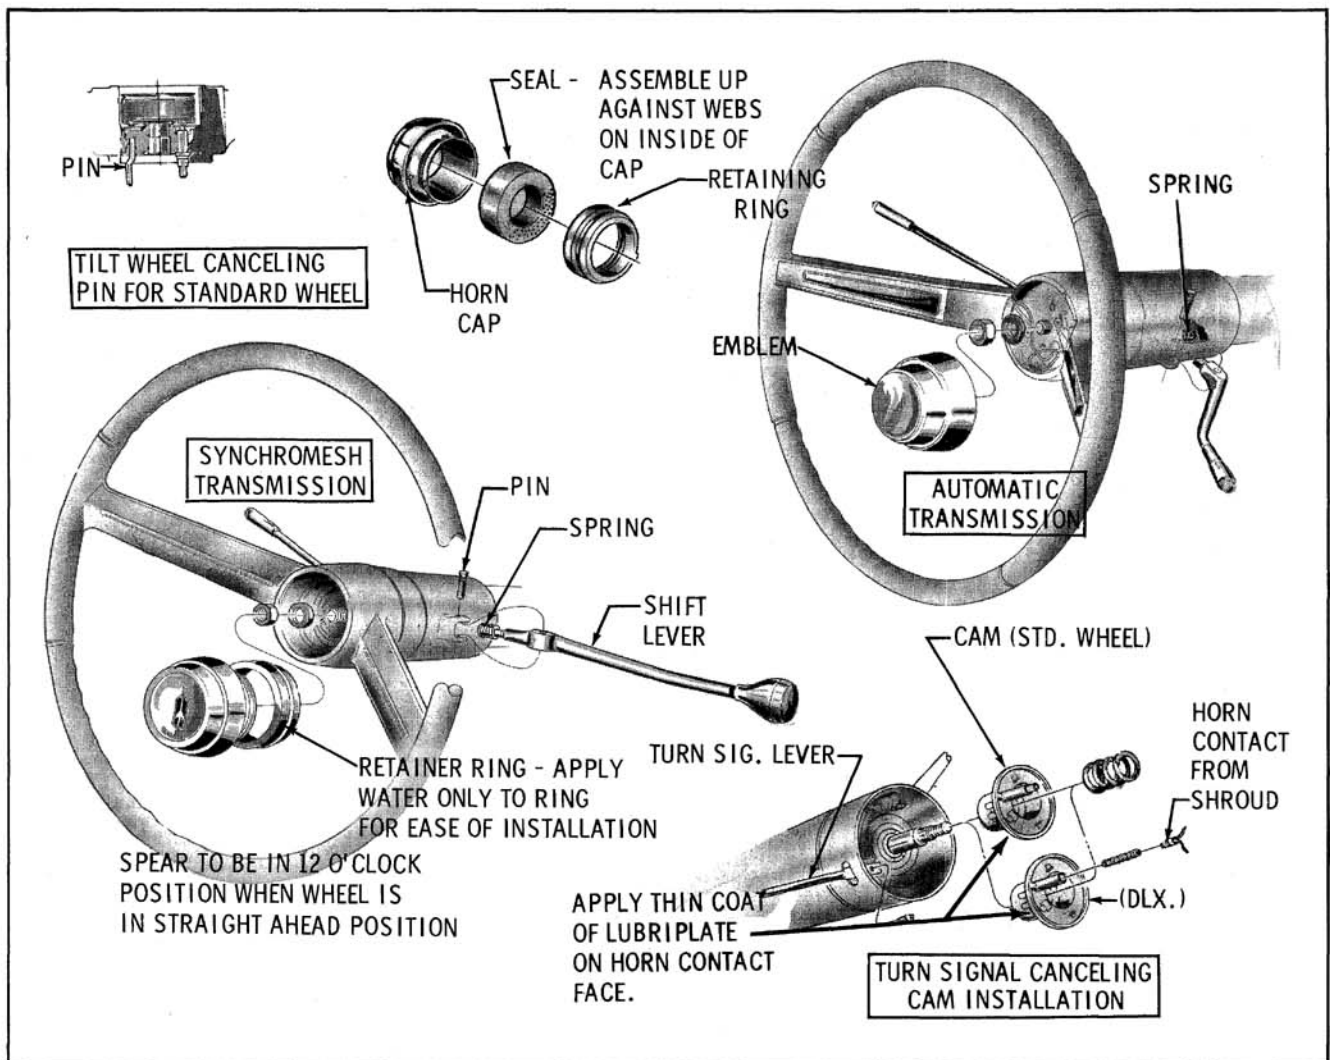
Steering Wheel Attachment (52 through 86 Series)
